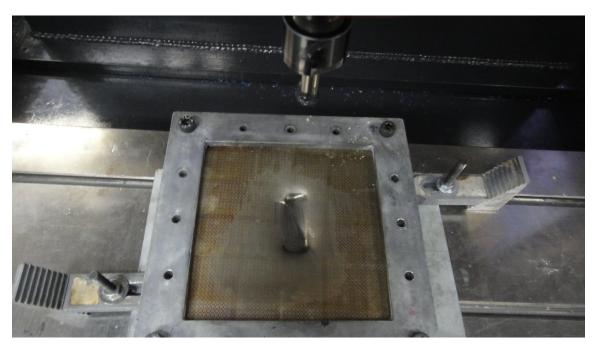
Component of the mandibular implant produced through single point incremental forming.
